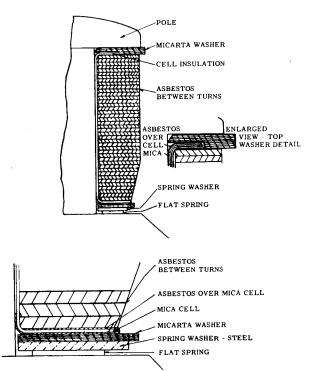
Cross Section View Showing Typical Construction OF FIELD COIL.
